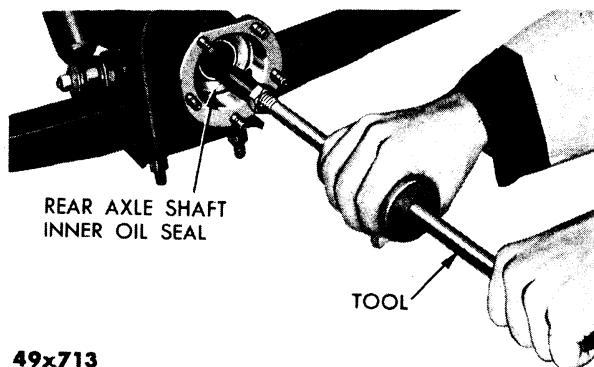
Removing Inner Oil Seal Using Tool C-637
